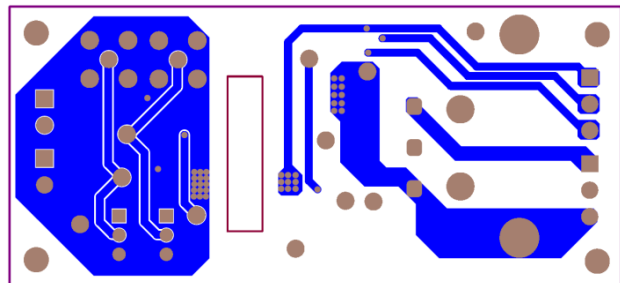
shows the top and bottom layer traces and copper of printed circuit board layout.
